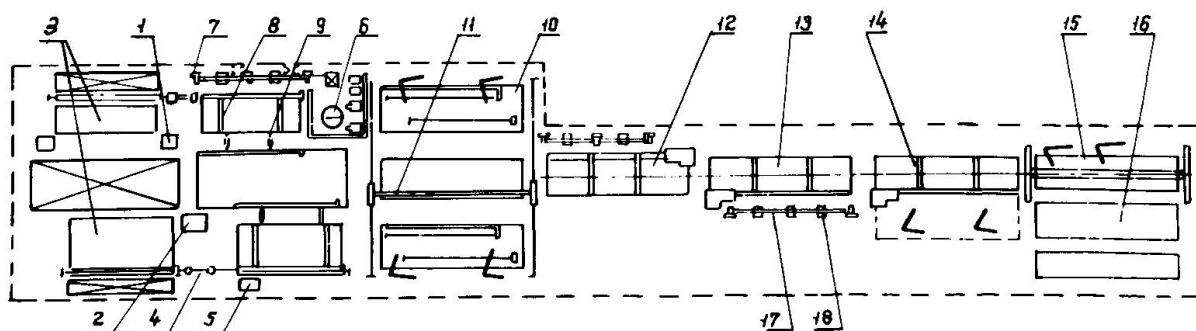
Lay-out of flow line for assemblage and welding of trusses made of tubes; 1 - set-up for automatic welding of inserts and flanges; 2 - flange automatic welding machine; 3 - stock; 4 - overloading device of chords; 5 - set-up for automatic welding of plate assembly unit; 6 - bearing plates assemblage and welding section; 7 - bearing plates assemblage and welding bench; 8 - horizontal stock; 9 - overloading device; 10 - truss assemblage set-up; 11 - transshipment crane; 12 - left-side tilter; 13 - right-side tilter; 14 - 180°-tilter; 15 - full rotation tilter; 16 - control bench; 17 - semi-automatic equipment hook-up device; 18 - semi-automatic welding machine.
